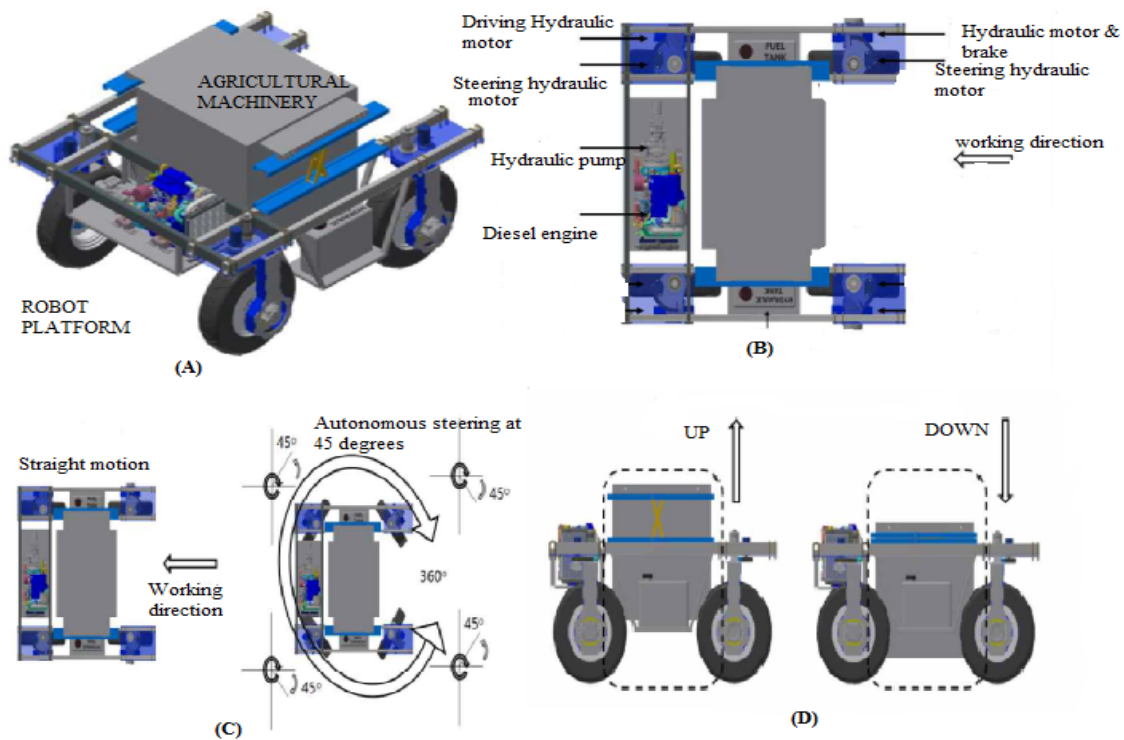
(a) Machine assembly and operation concept; (b) Hydraulic system configuration concept; (c) Steering system configuration concept; (d) Concept for Lifting system for machinery
